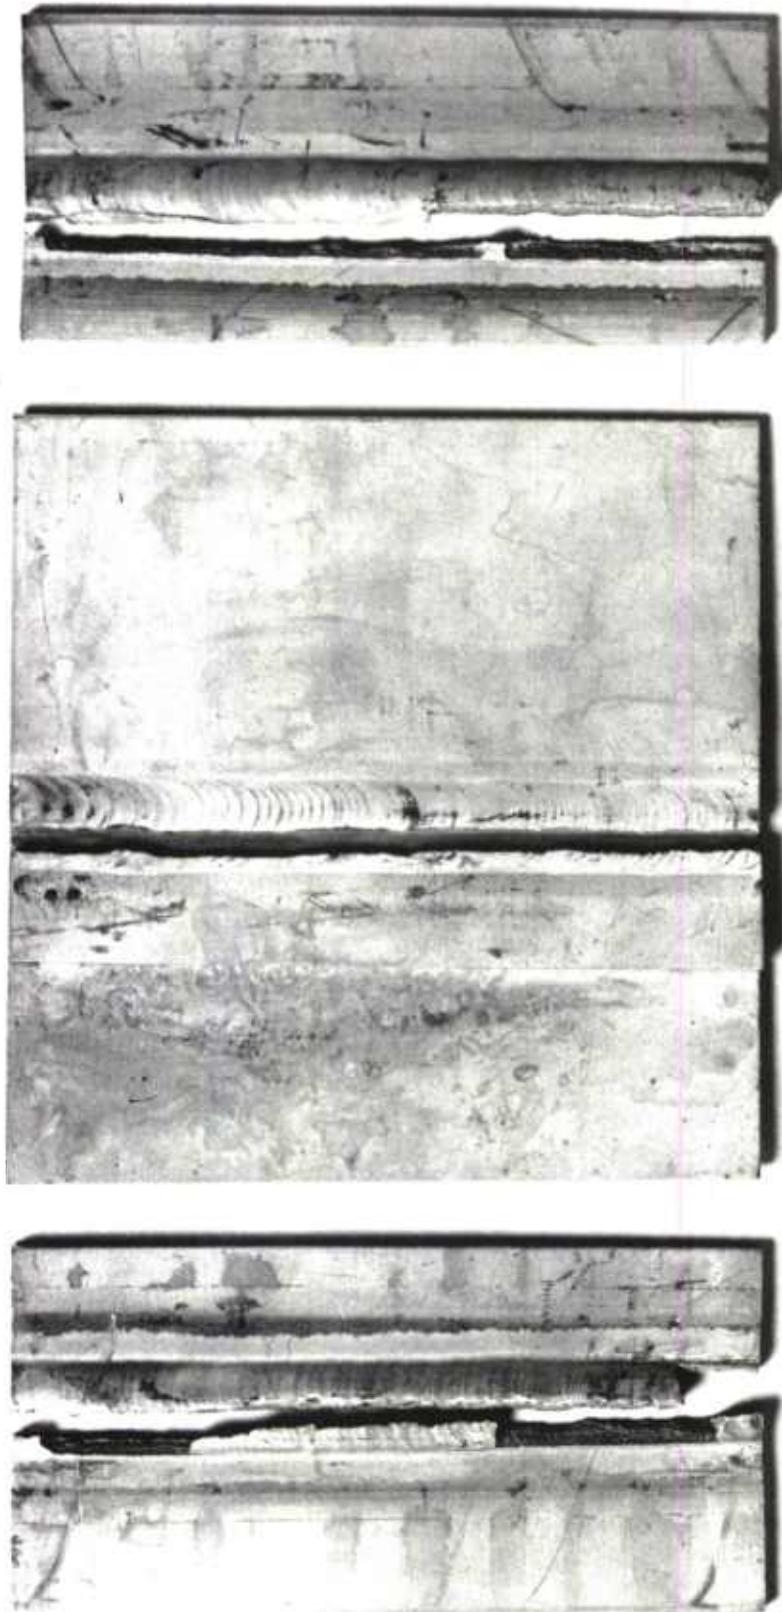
Fractured Fatigue Specimens - 2014-T6 Aluminum Alloy (-423° F)
